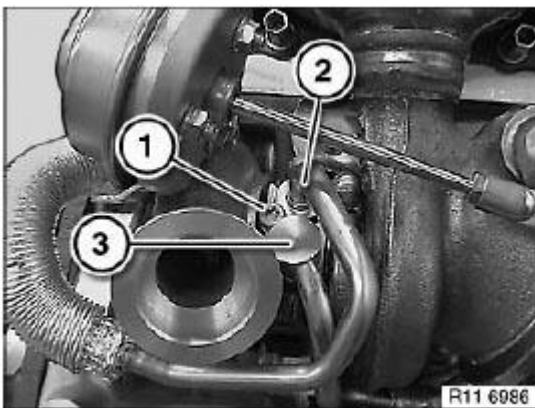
Identifying Coolant Feed Pipe, Coolant Return Pipe And Screws
